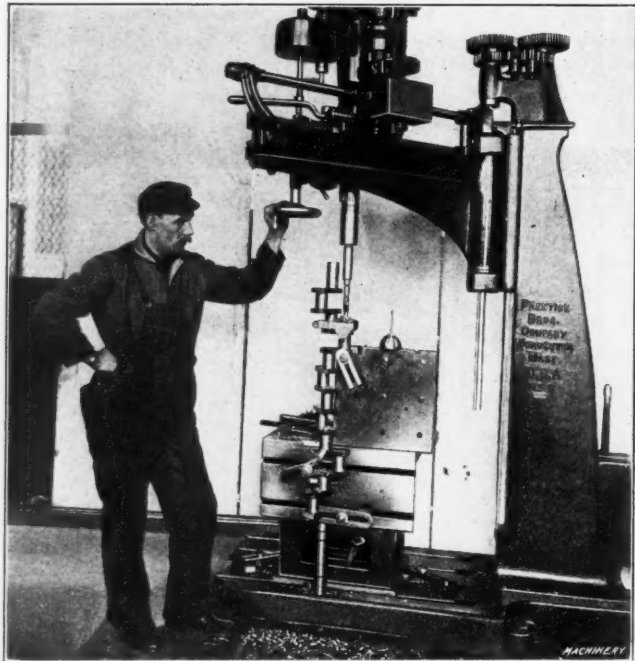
Drilling out the Pins of the Hollow Crankshaft
